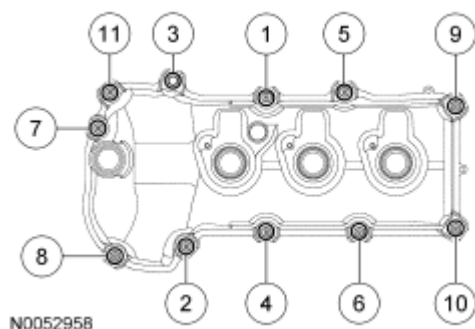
Installing RH Valve Cover Stud Bolts In Sequence
